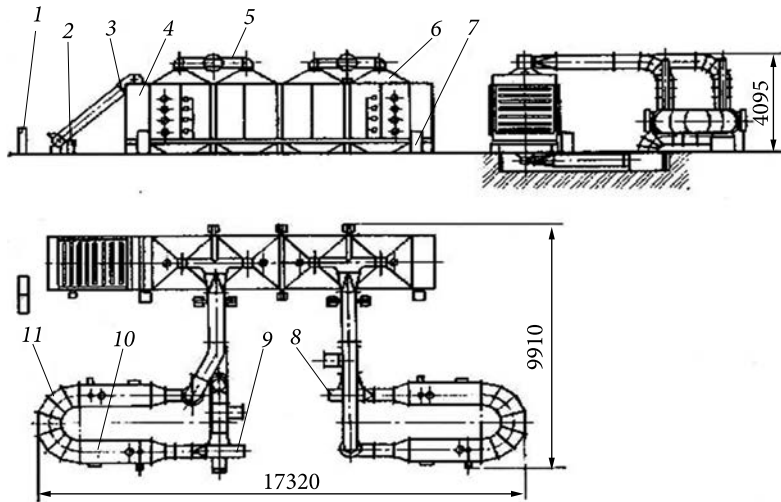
Conveyor dryer KSK-2 developed in IET NAS of Ukraine for drying vegetables and fruits: 1 — control panel; 2 — autonomous drive station; 3 — loading conveyor; 4 — drying chamber; 5 — collectors; 6 — exhaust boxes; 7 — drive; 8, 9 — centrifugal fans; 10 — heat generators; 11 — air ducts
